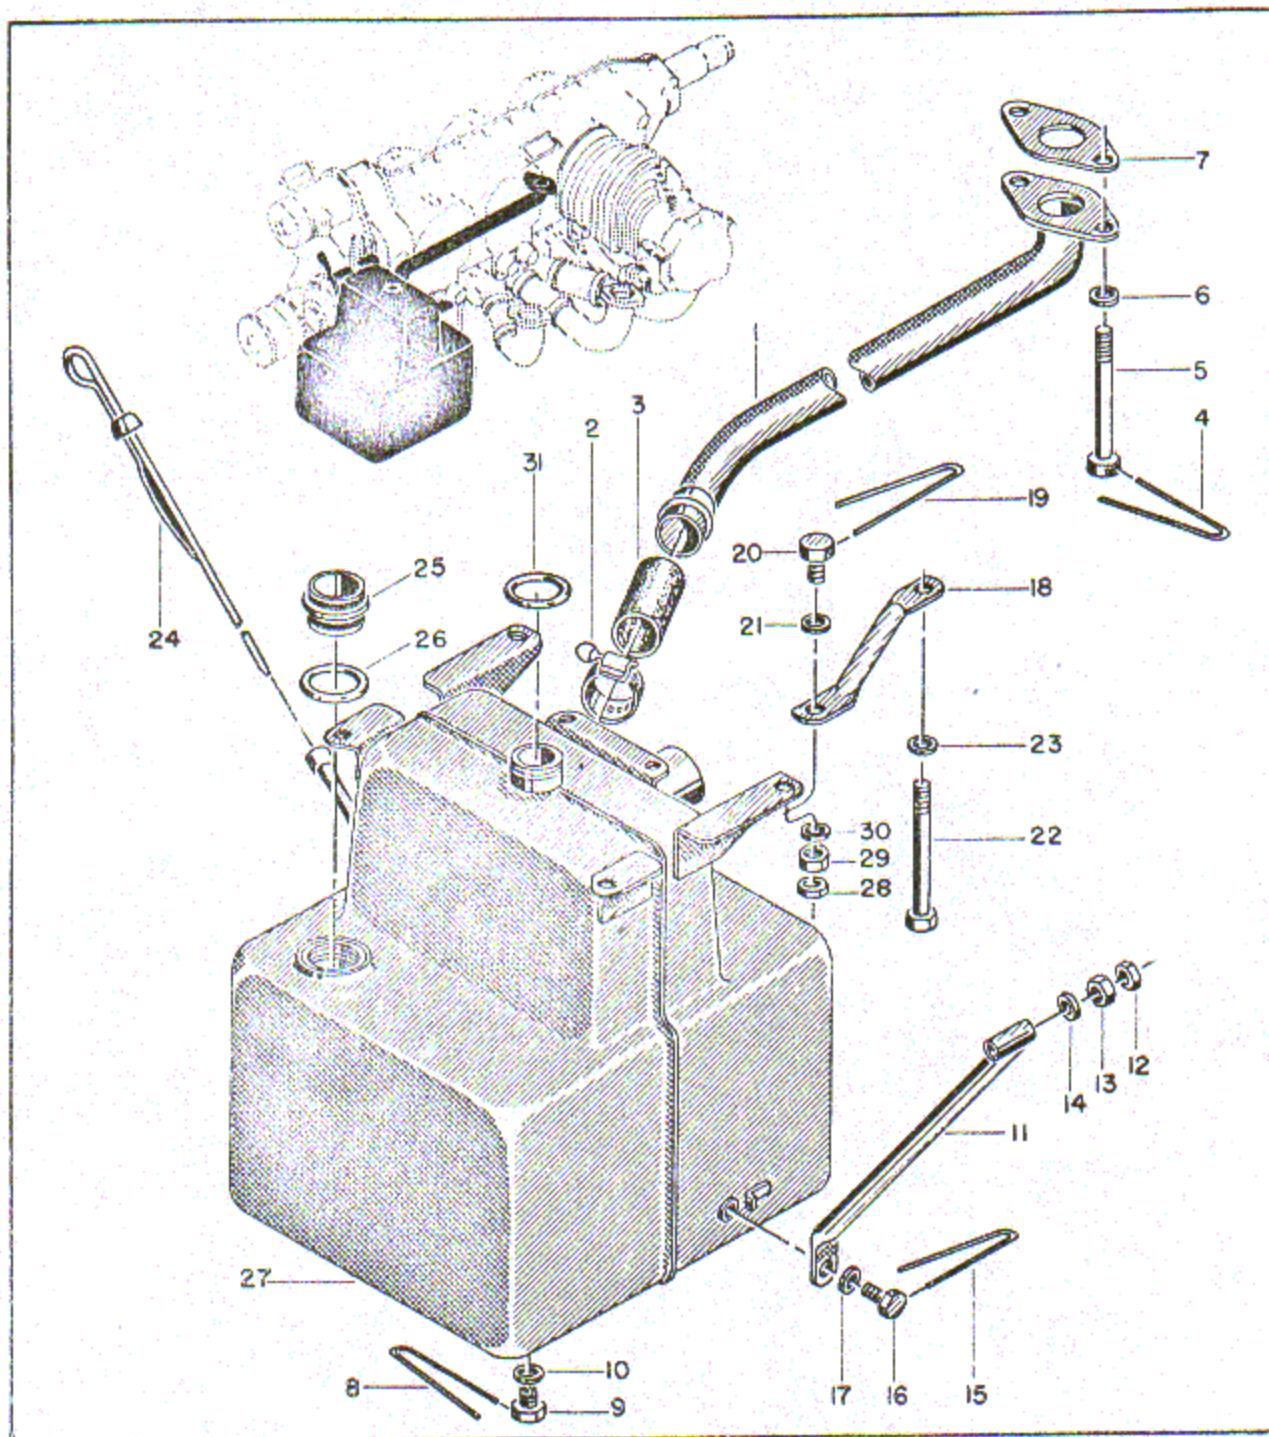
Exploded Parts View of O-470-7 Oil Sump
